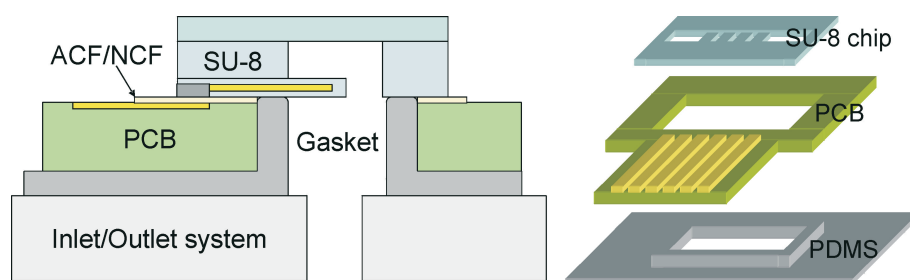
Schematic drawings of the large PDMS gasket. Left and right: By making the gasket and the sealing layer between the PCB and the microfluidic system as one part, a tight sealing was obtained.
